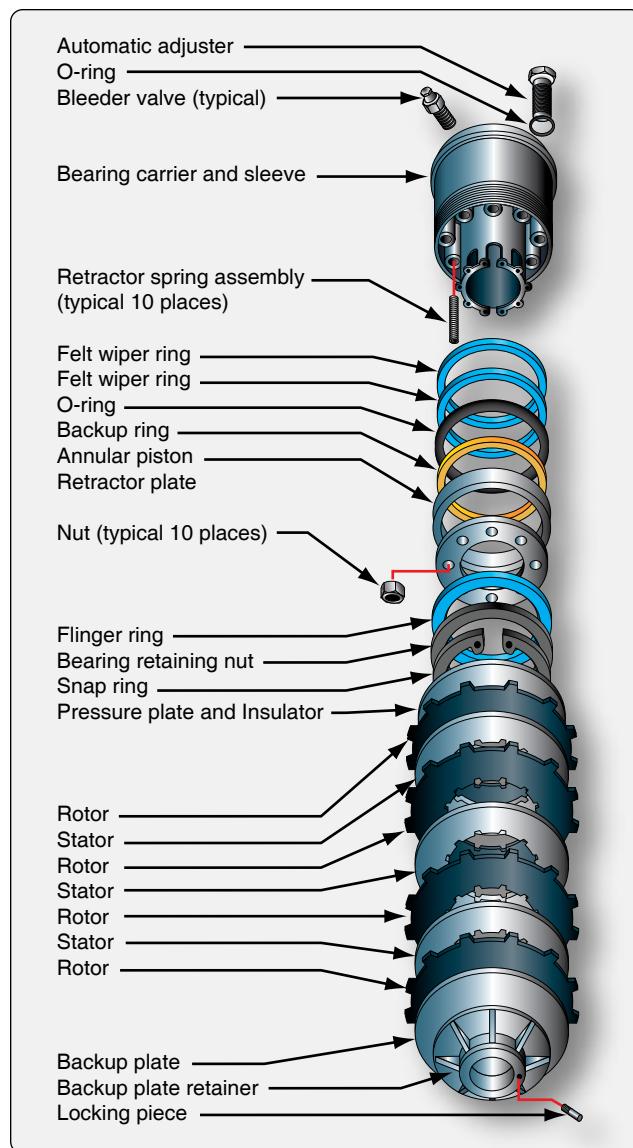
A multiple disc brake with bearing carrier upon which the parts of the brake are assembled including an annular cylinder and piston assembly that apply pressure evenly to a stack of rotors and stators.
